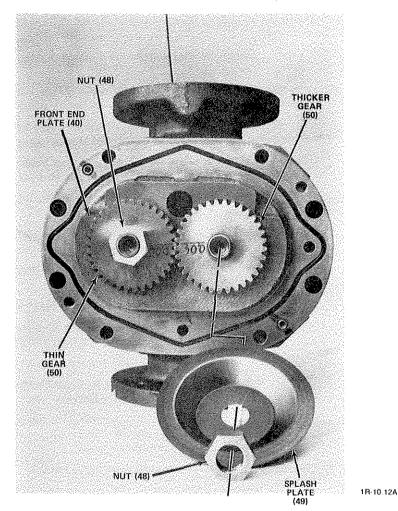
Gears Installed on the Pump with the Scribe Lines Aligned (WA-250 pump model shown).
